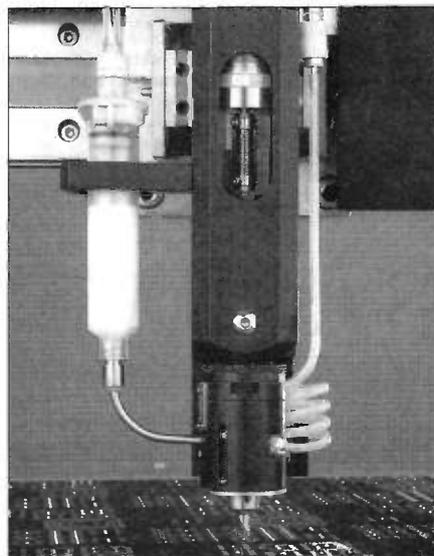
Nozzle dispensing of adhesive or solder paste onto the surface of a PCB.
